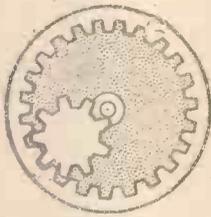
Internal toothed-gear wheel and pinion which maintains the direction of rotation.
